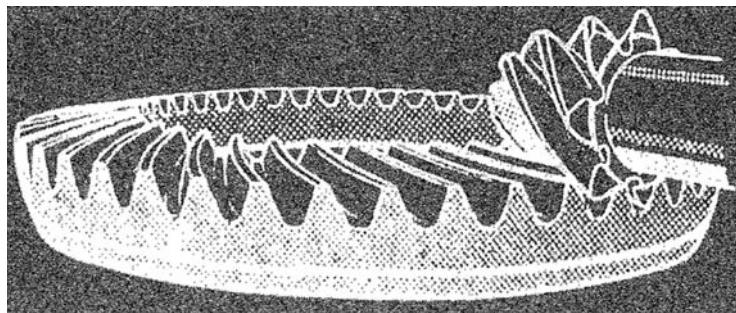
Spiral bevel gears. (Courtesy of Lubrizol Corp.)
